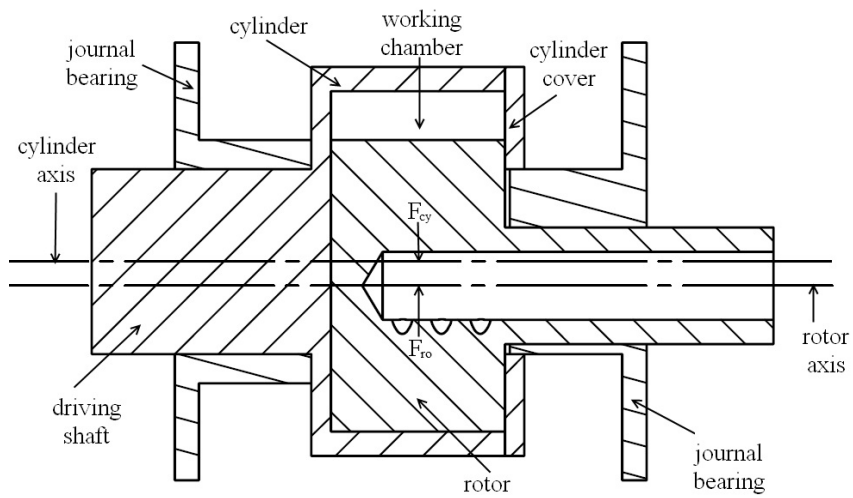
Journal bearing arrangement in fixed-vane revolving vane compressor (Type I)
